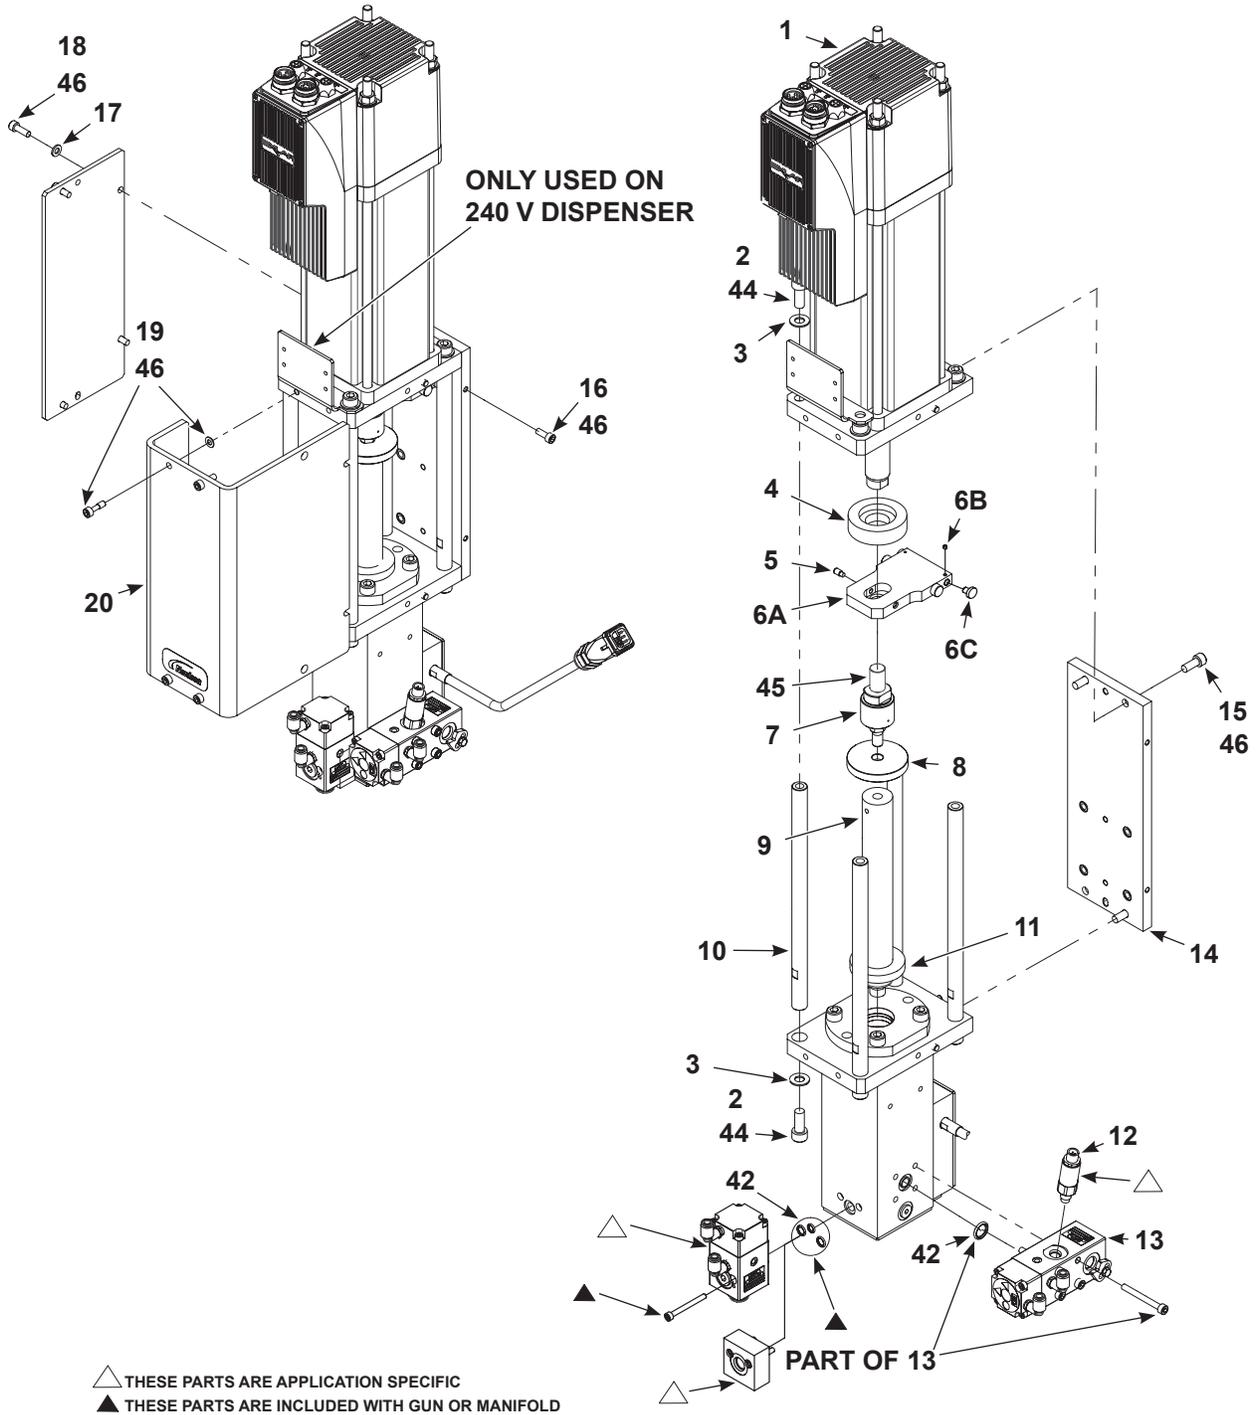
S100 120/240 V Heated E-Net Dispenser Parts
